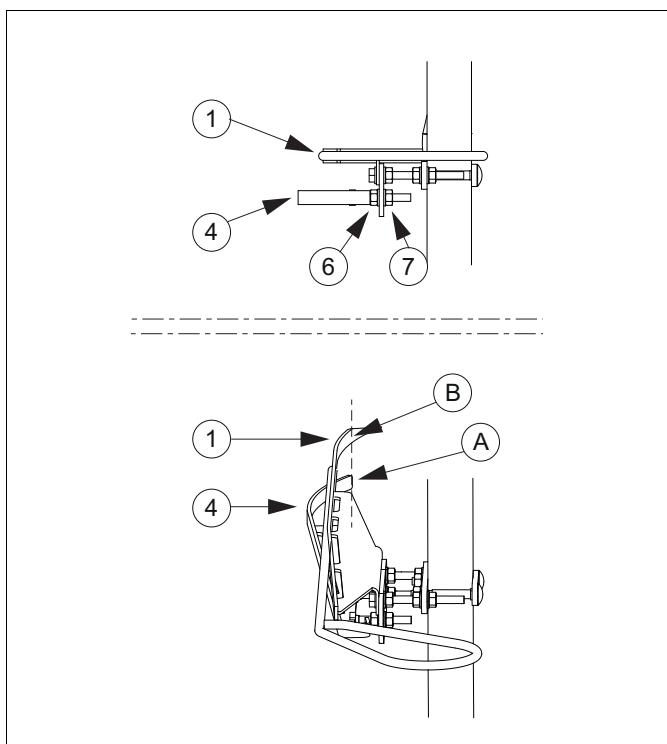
Adjust the FIM RotoVac 20 RS with Neck Skin Cutting Module inner shackle bump out guide bolts
